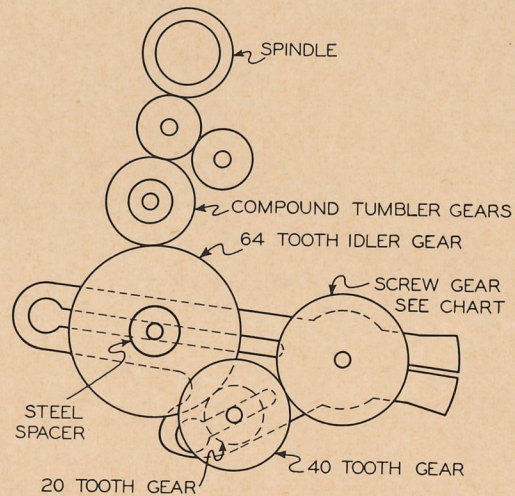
Gear set-up for 11 through 16 threads per inch.
